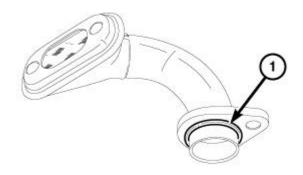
Oil Pick-Up Tube O-Ring Seal
